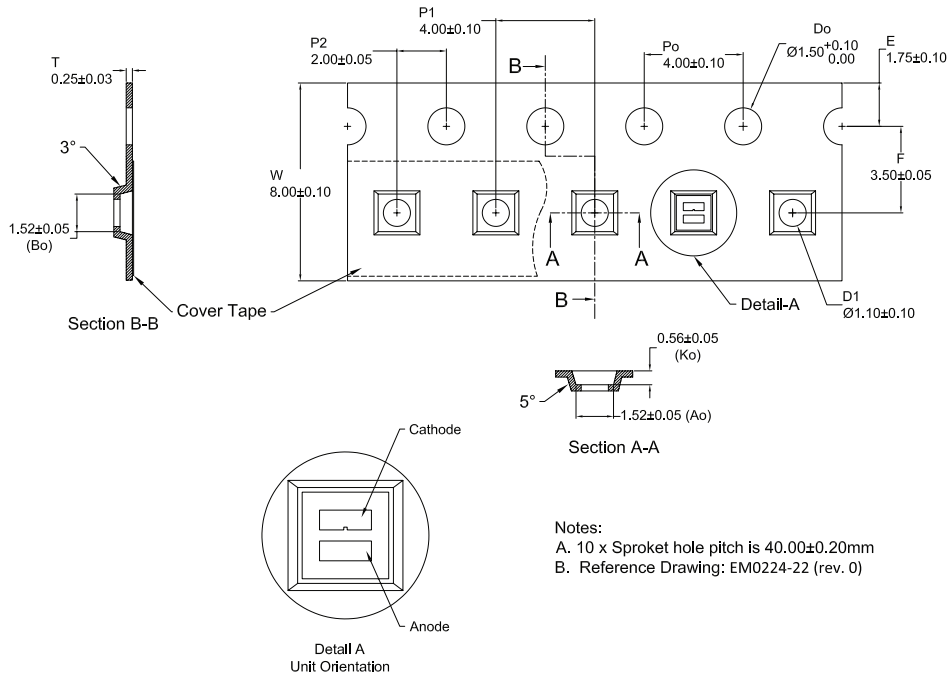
Pocket Tape dimensions for LUXEON HL1Z Color Line
